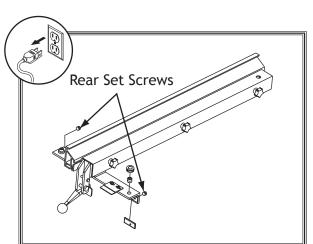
Location of screws used to adjust fence parallelism and clamping pressure.
